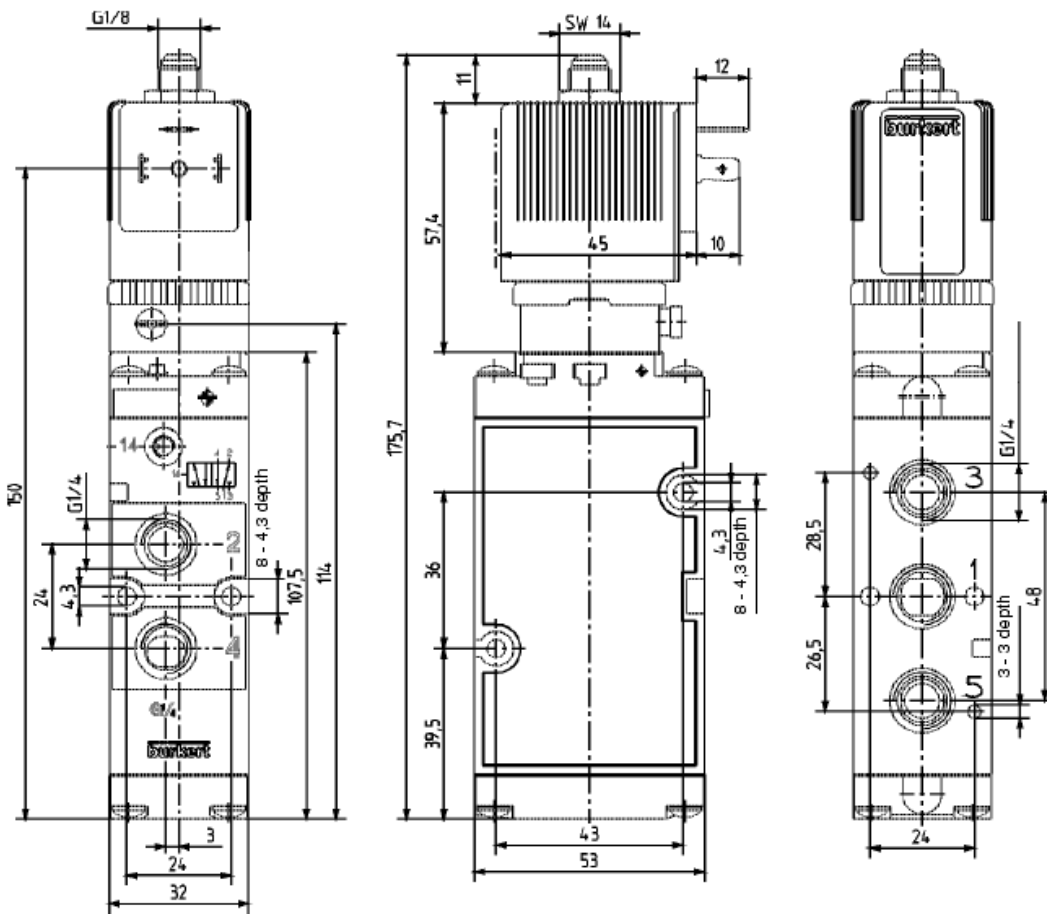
Assembly drawing 3/2 way solenoid valve 6518-\*-\
